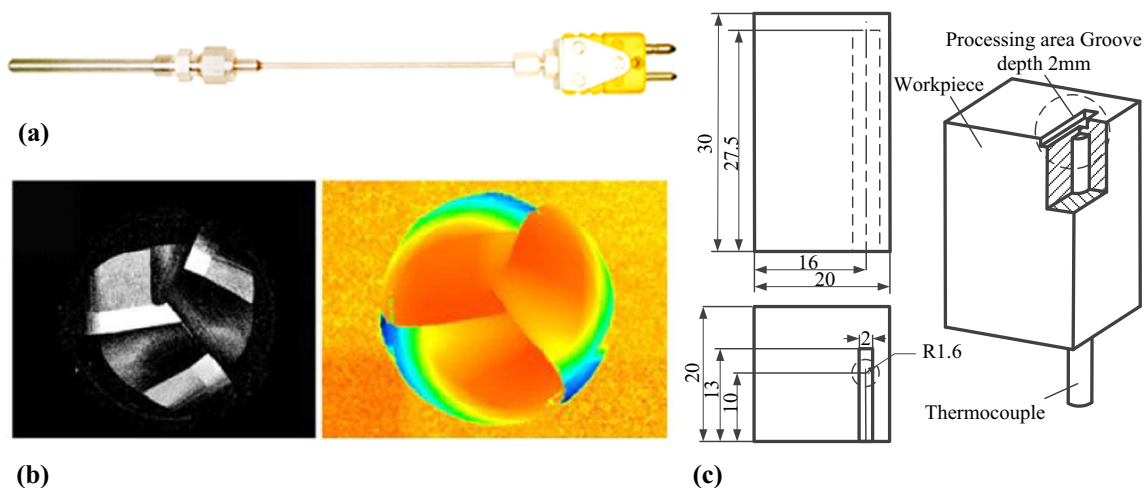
a Thermocouple. b End milling cutter. c Schematic diagram of workpiece
